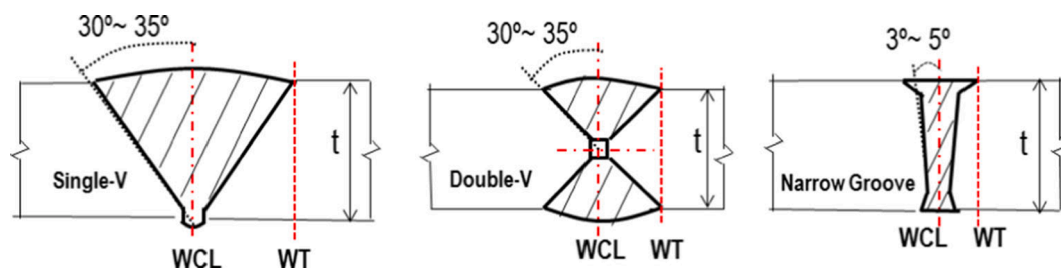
Illustration of various weld joint configurations investigated in PVRC JIP Phase 2 [40]. Single V (SV), double V (DV), and narrow groove (NG), adapted from [34].
